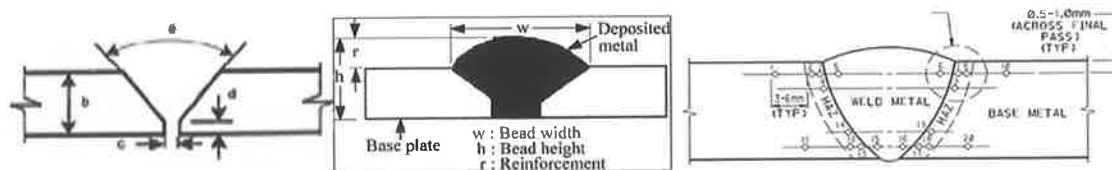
Weld Joint Design/geometry and hardness test location [WPS used for welding given in Annexure-4]
